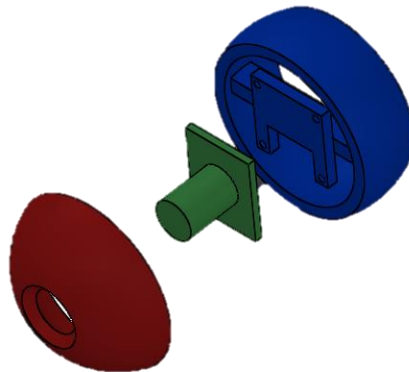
Exploded view of eye pieces showing enclosed camera (green)
